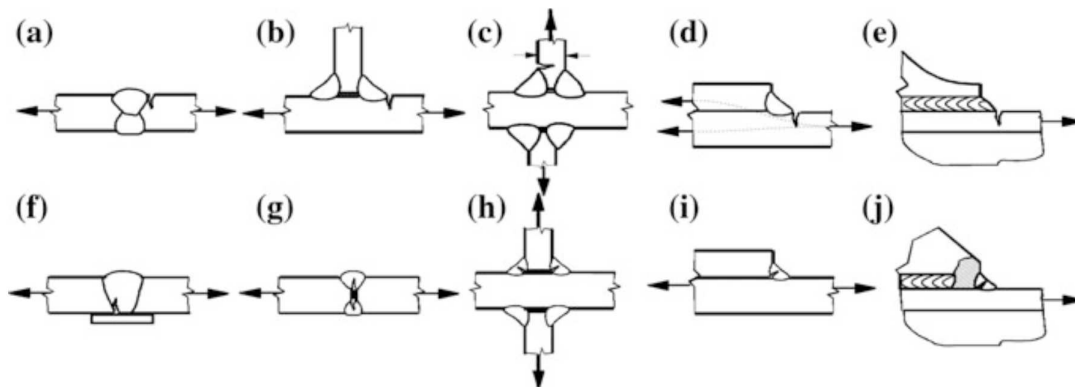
Different locations of crack propagation in welded joints: a-e represents weld toe cracks, where SHSS approach can be applied; f-i represents weld root cracks, where SHSS approach can not be applied [1]
